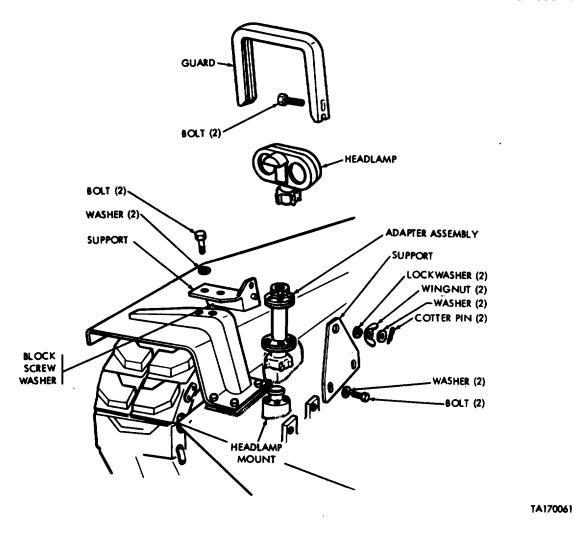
Removal or installation of headlamp adapter (early model bulldozer).
